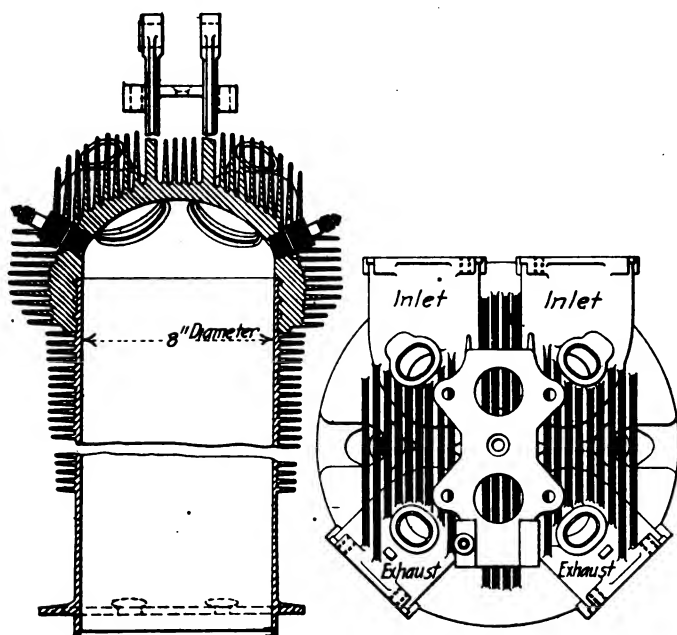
PLAN VIEW AND SECTIONAL ELEVATION OF THE 19T 8 X 10-IN. CYLINDER WITH CAST-ON ALUMINUM HEAD DEVELOPED BY THE ROYAL AIRCRAFT ESTABLISHMENT
